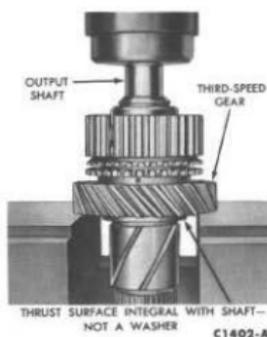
Removing 3rd Gear and 3rd and 4th Synchronizer Hub
